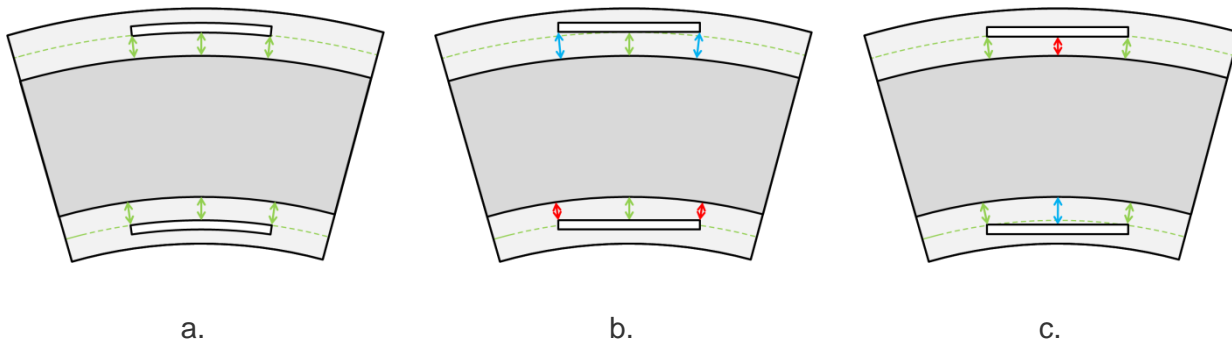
Cutting of overlay weld test specimens from curved surfaces.
